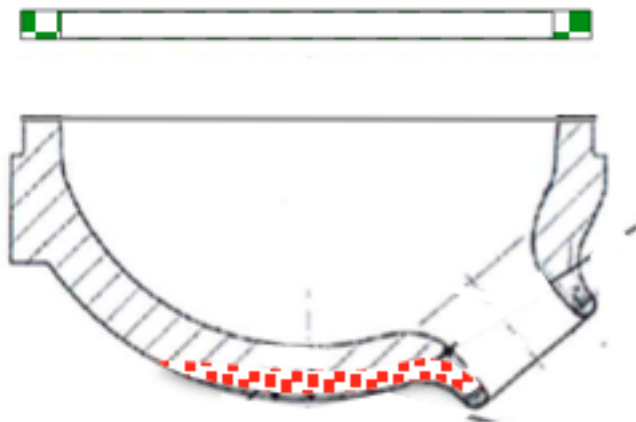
BOTTOM CHANNEL HEAD & TEST RING
